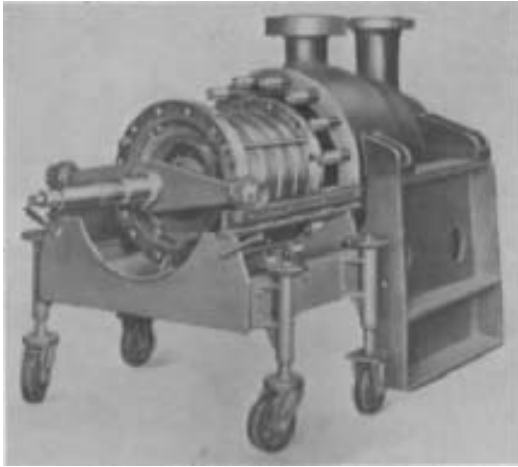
Rotor assembly of a radially split, double-casing pump being inserted into its outer casing (Flowserve Corporation)
